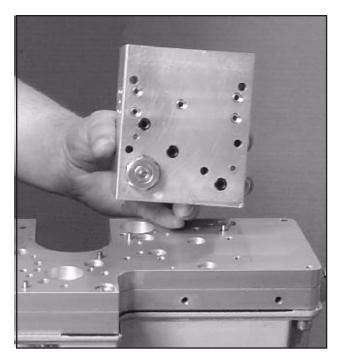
Replace the three o-rings and install the Super V Valve Block Assembly to the Base Plate.
